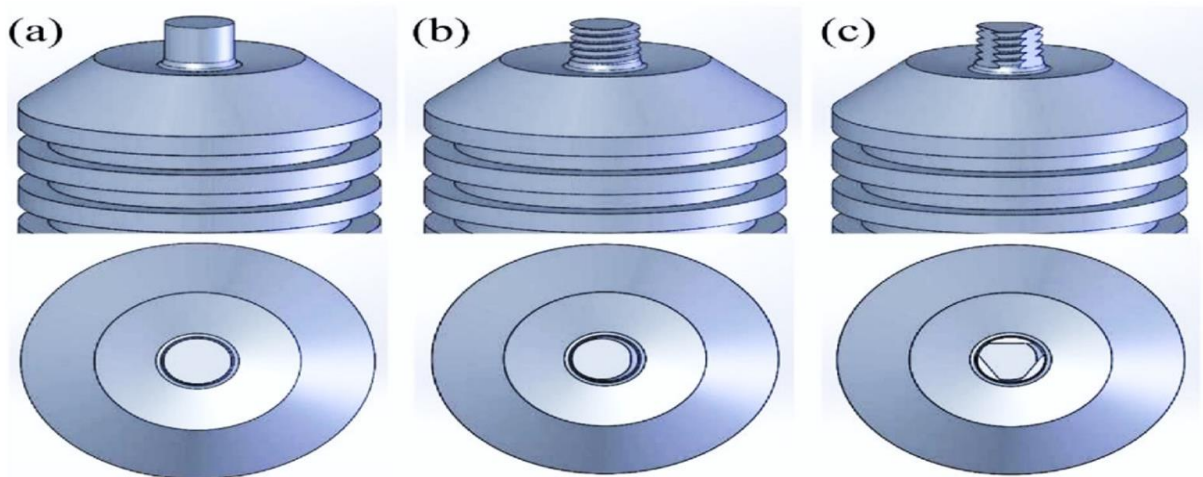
Illustration of the welding tool with different pin shapes: (a) featureless pin, (b) threaded pin, (c) threaded pin with flutes [59].
